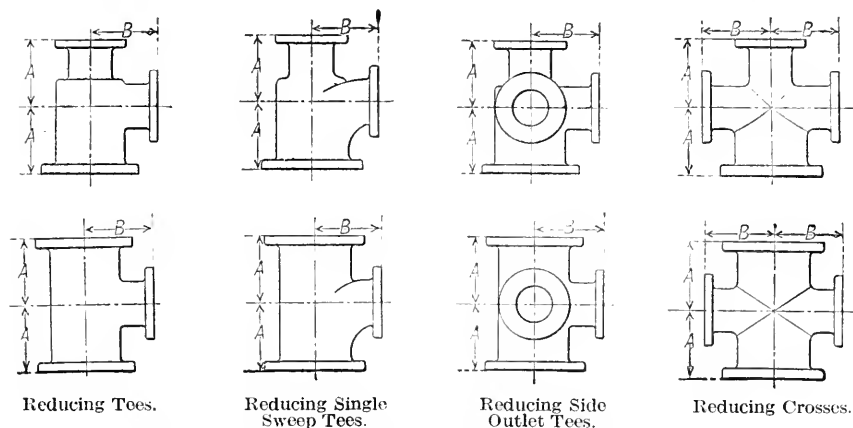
STANDARD AND EXTRA HEAVY REDUCING FLANGED FITTINGS
